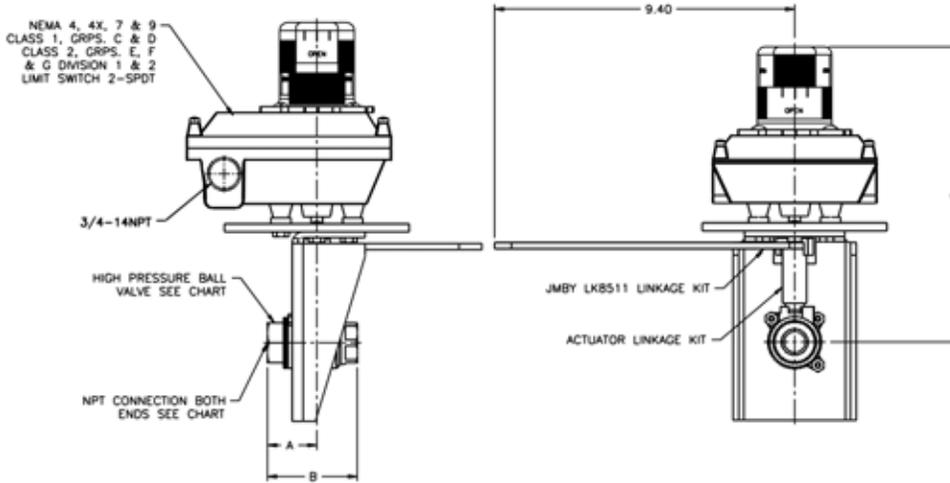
Lockout Valve with Explosion Proof Limit Switches
